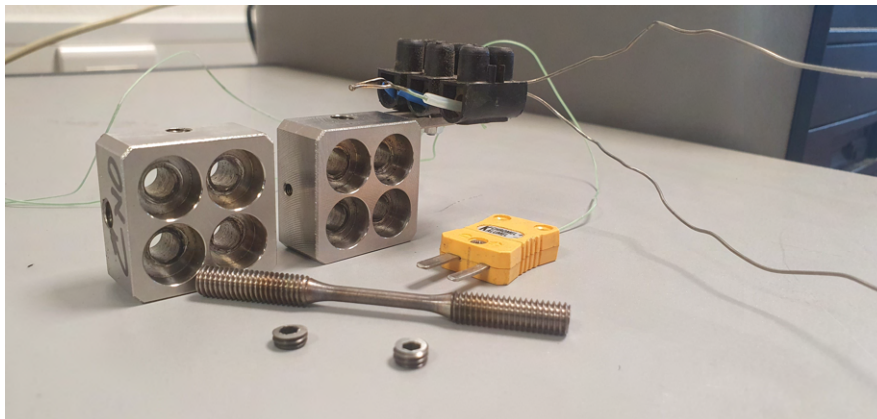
LCF specimen's grips and custom hexagonal screws
